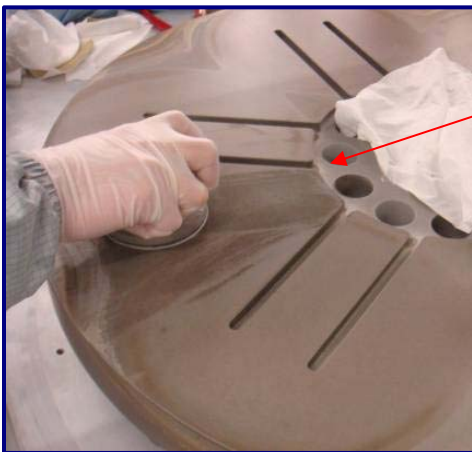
& 22: Scrubbing heater block in front-to-back and back-to-front motion
